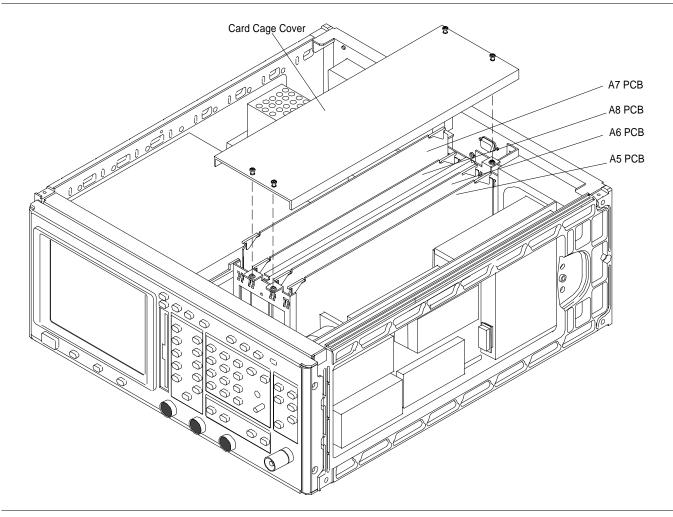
Exploded View of A5, A6, A7 and A8 PCBs
